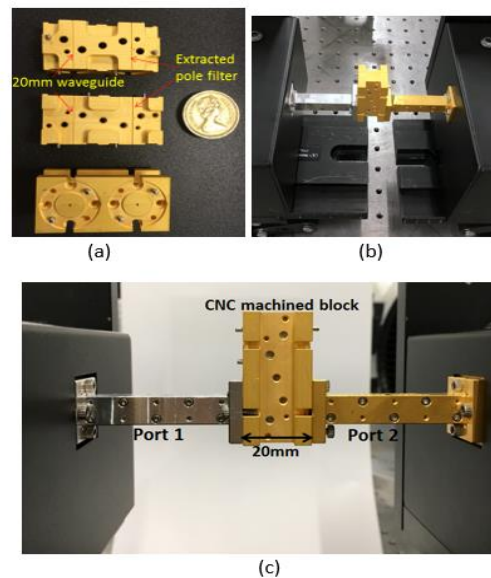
Measurement set up for CNC milled extracted pole filter: (a) Photograph of the filter blocks fabricated by CNC milling (20×20mm×40mm). (b) (c) Test setup for the CNC milled extracted pole filter and 20mm length waveguide.
